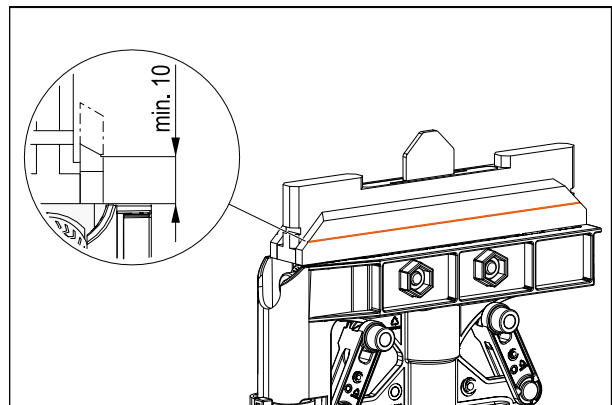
Lower edge of sliding contact chamfer must not fall below notch in sliding contact
